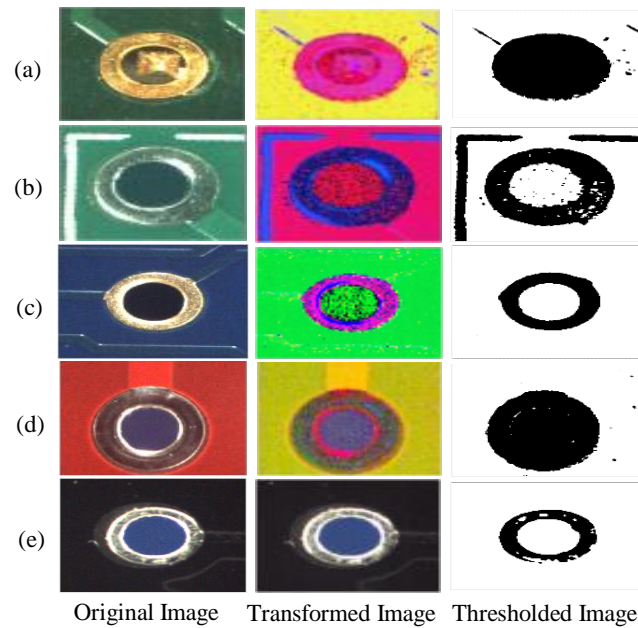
Thresholding of colour clustered images for solder pad segmentation. (a) Thresholded gold plated solder joint on green PCB. (b) Thresholded tin plated solder joint on green PCB. (c) Thresholded gold plated solder joint on blue PCB. (d) Thresholded tin plated solder joint on red PCB. (e) Thresholded tin plated solder joint on black PCB
